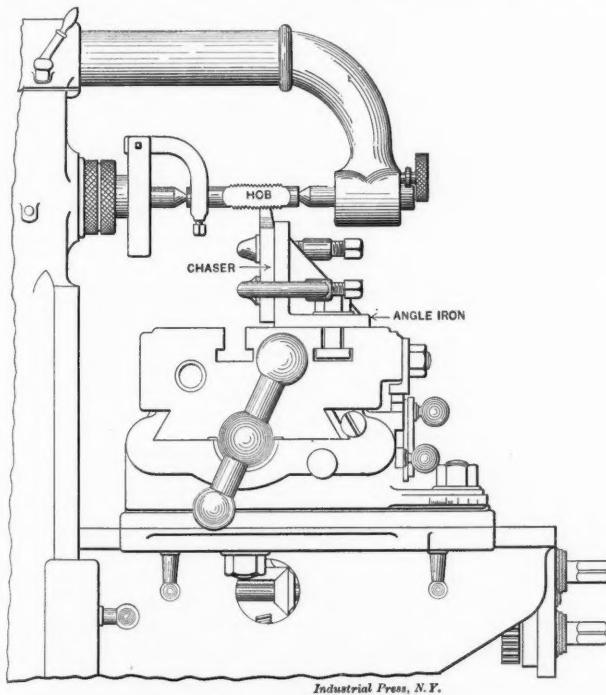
Milling Machine arranged for Hobbing Chaser.
